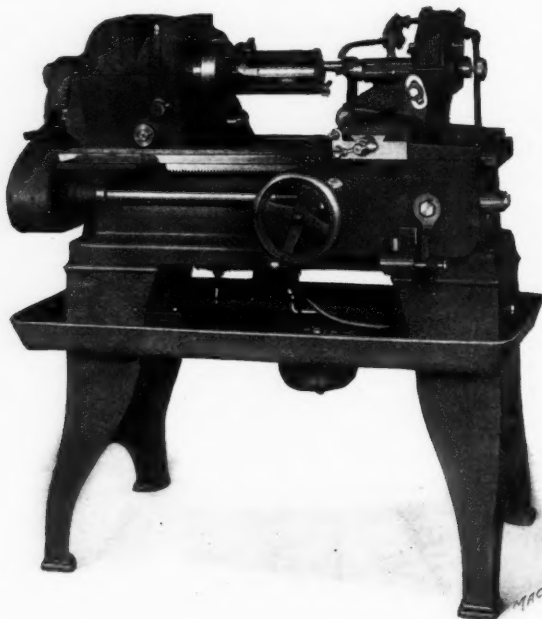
Internal Thread Milling Machine for threading Rifle Receivers
